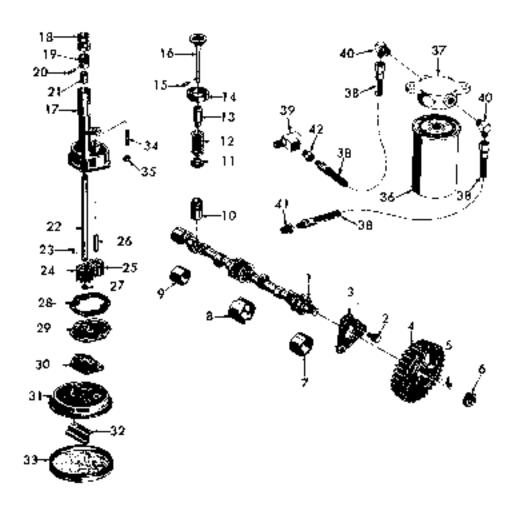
CAMSHAFT, VALVES AND OIL PUMP
